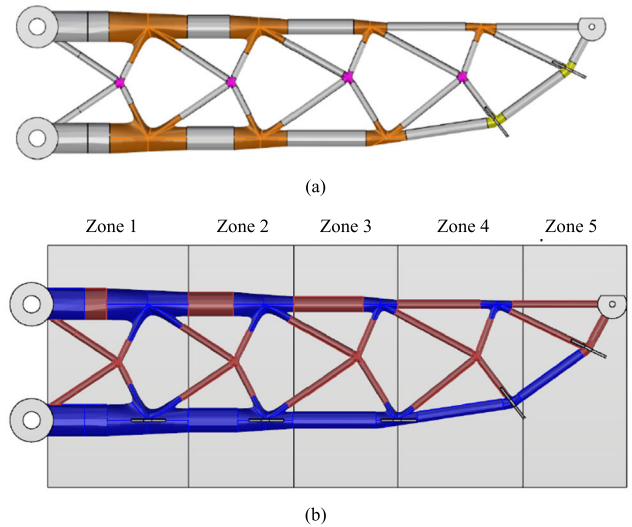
Grouping of cantilever truss members: (a) 3 types of connections and (b) 5 building zones.
